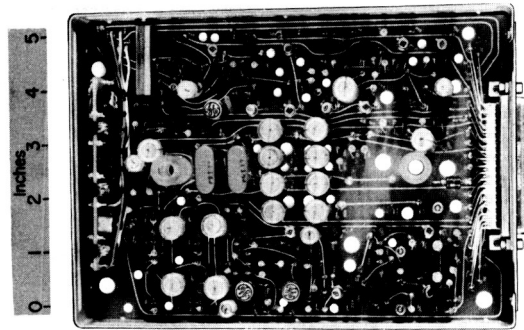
Printed circuit card, mounting component of medium density.
